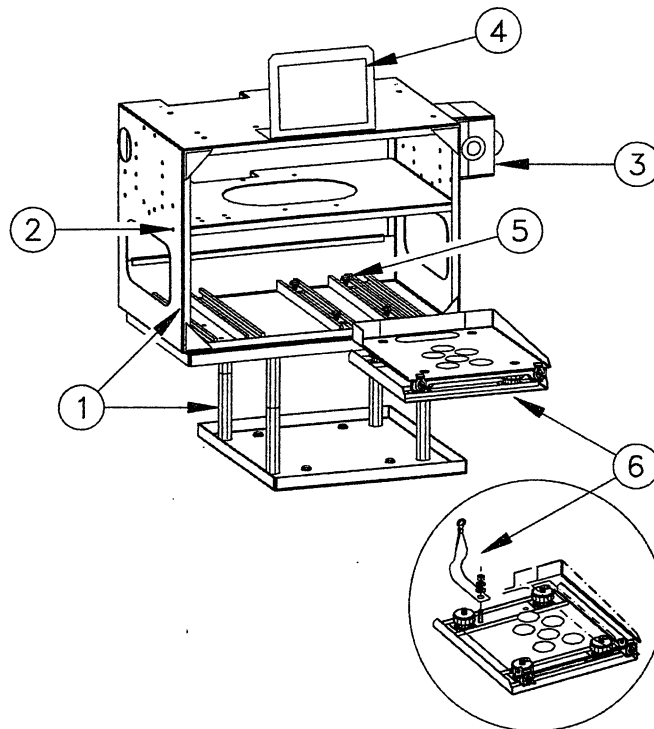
(Sheet 1 of 2) Whip Support Assembly Installation
